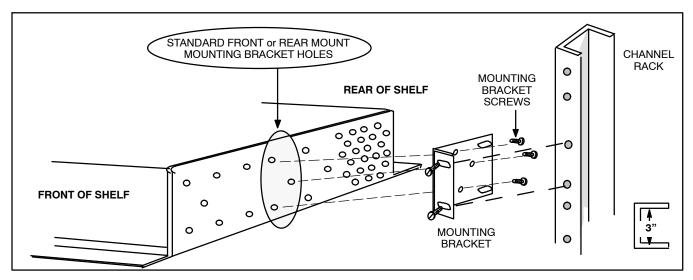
Shelf Mounting Bracket Position for Standard Front or Rear Mount
